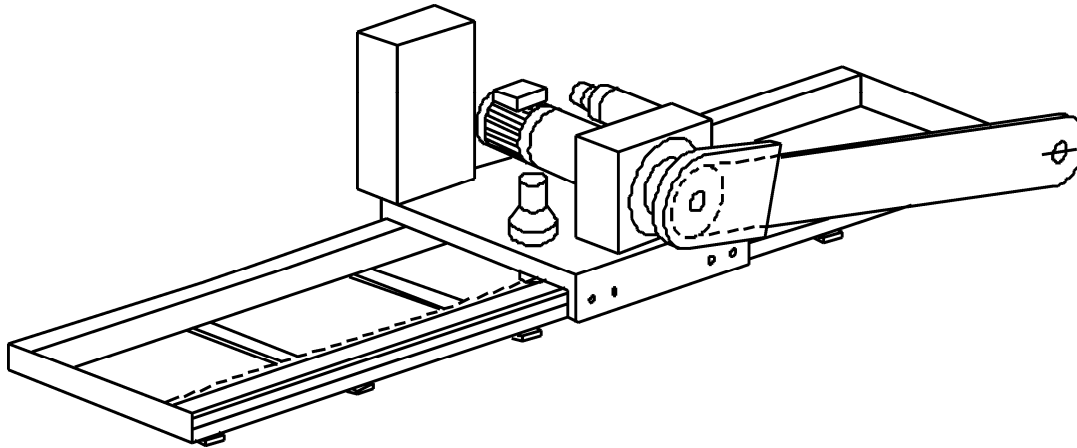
Transportable chain- or belt-slotting machine for open-cast quarries
